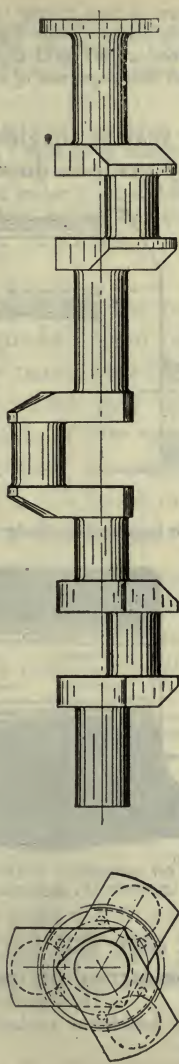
Crank shaft assembly of Watertown engine, shown disassembled in figs. 310 to 312.
